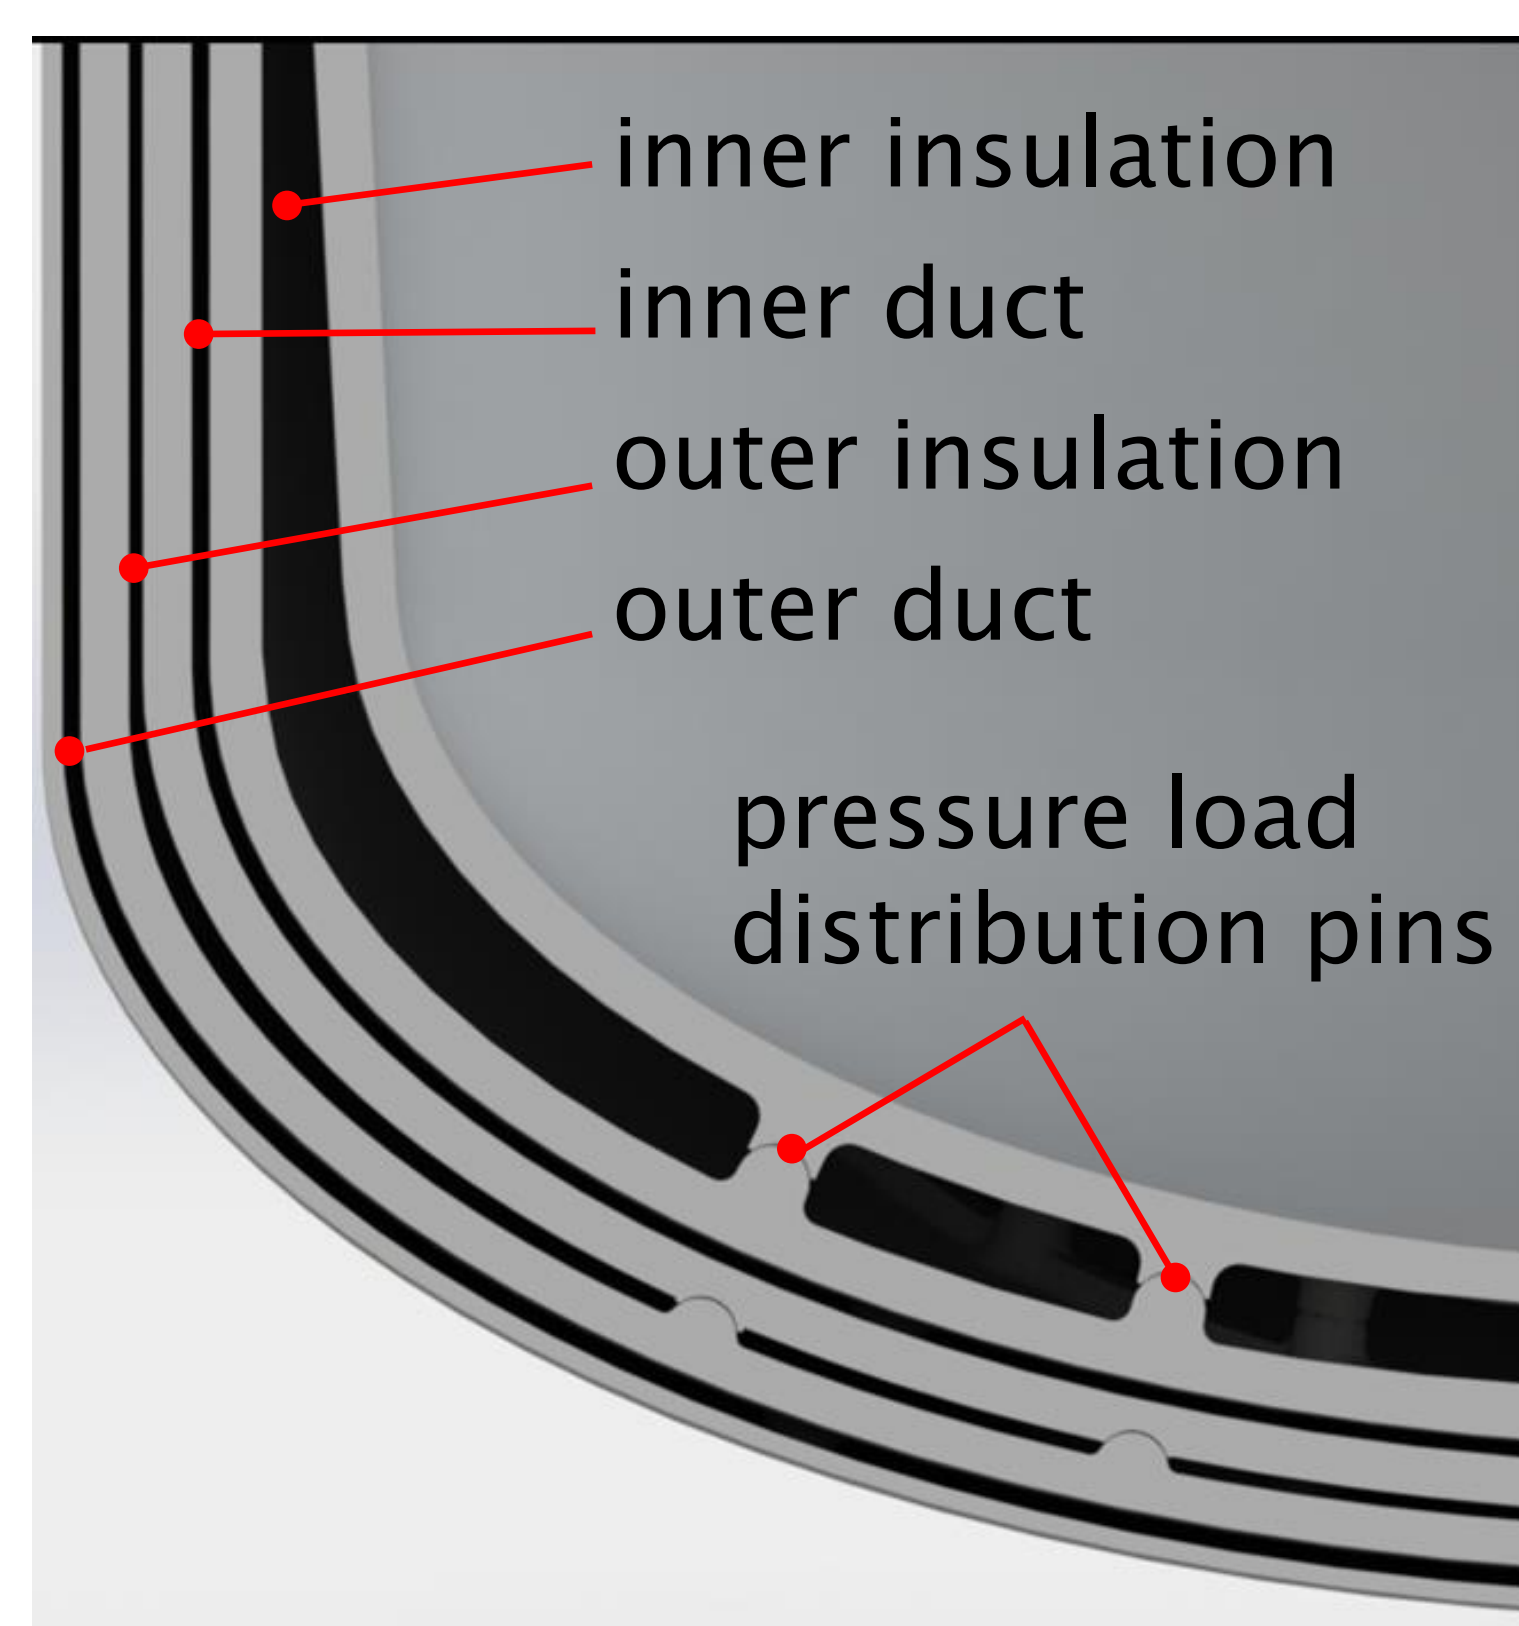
Cross-section of tank reveals gas passages and inert gas filled / insulated layers.
